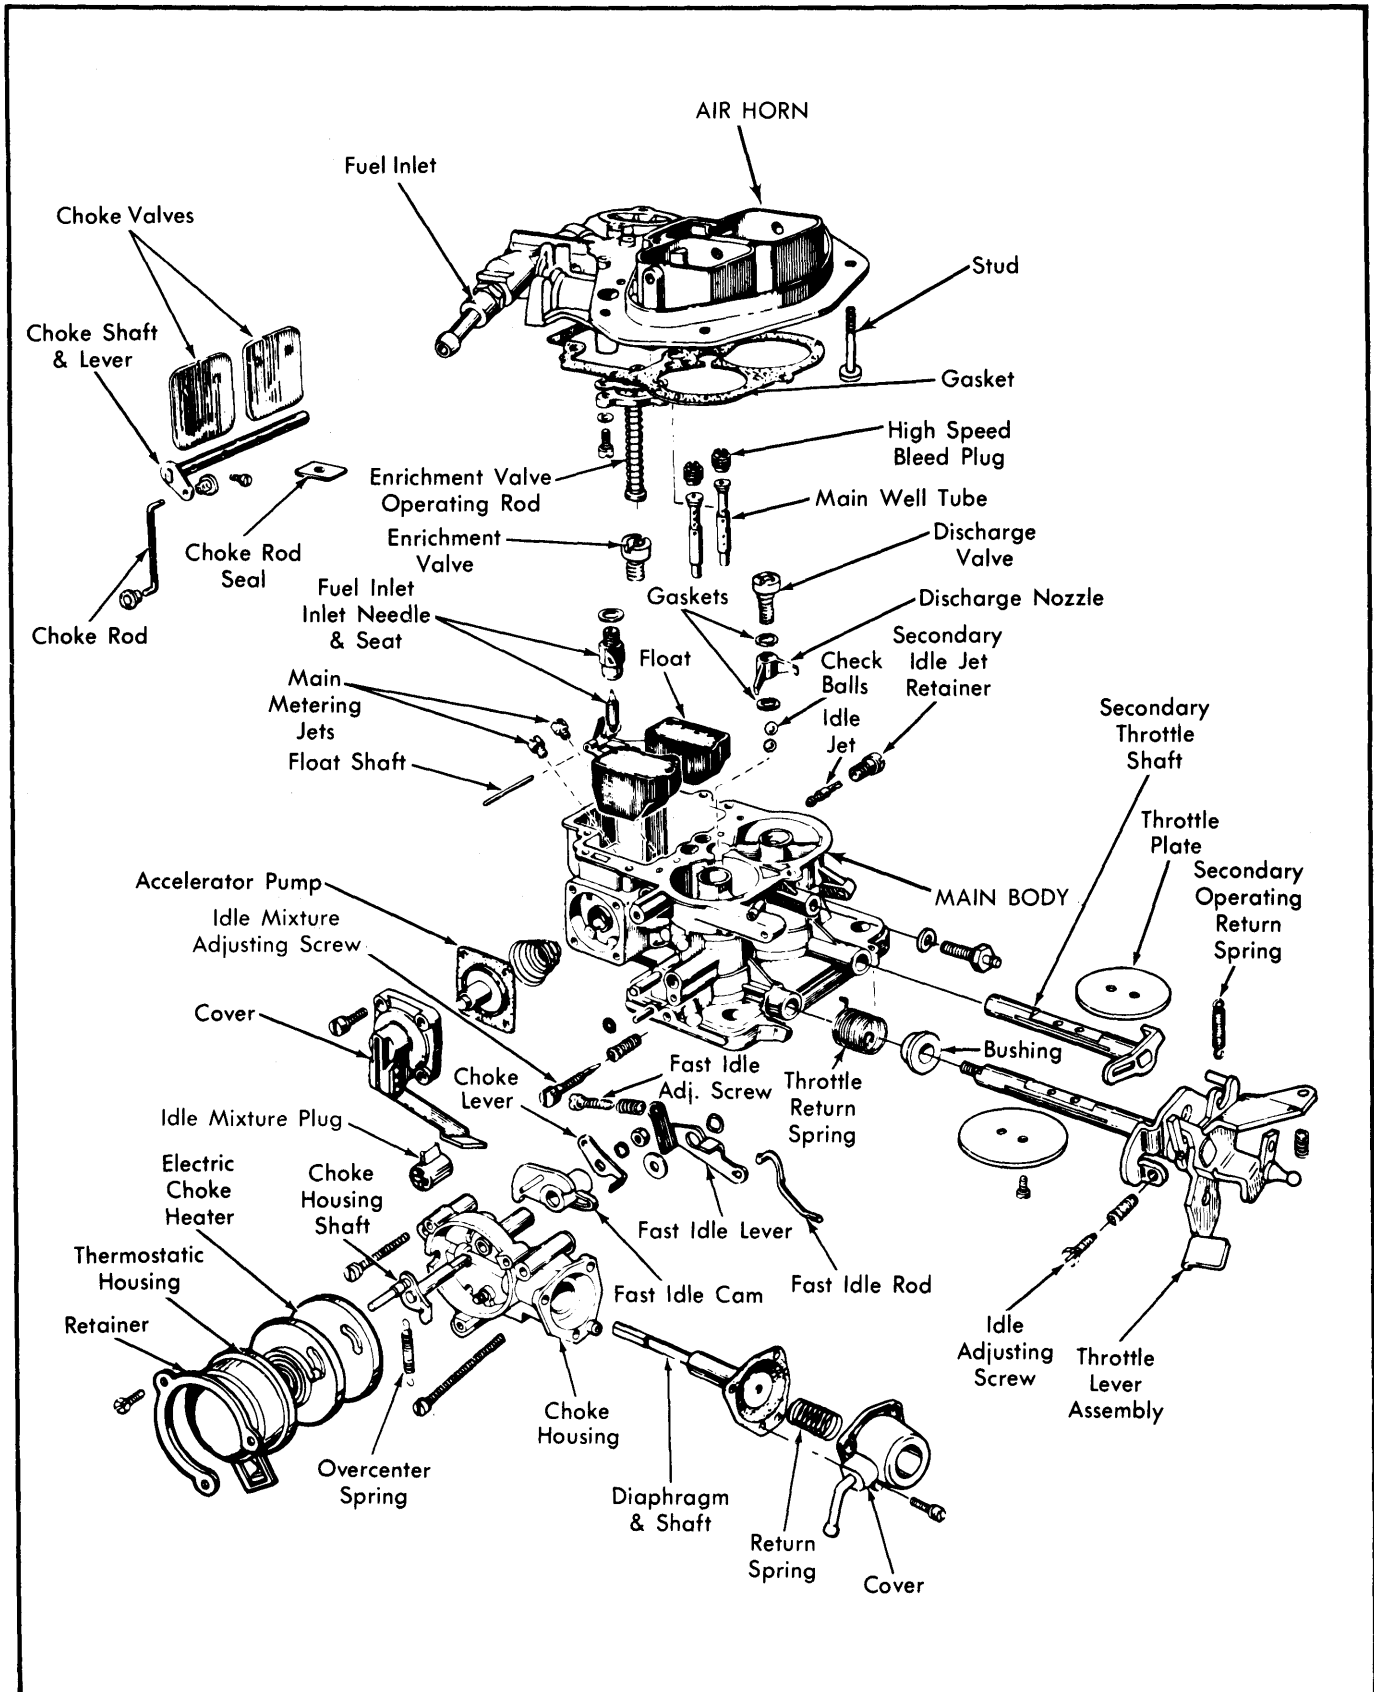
Exploded View of Holley Model 5220 2-Barrel Carburetor
